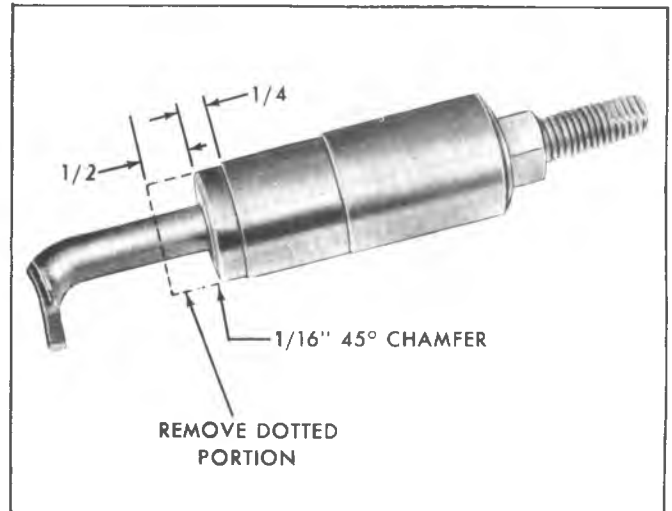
B4-82--Revised Shift Tube Removing Tool J-22551
